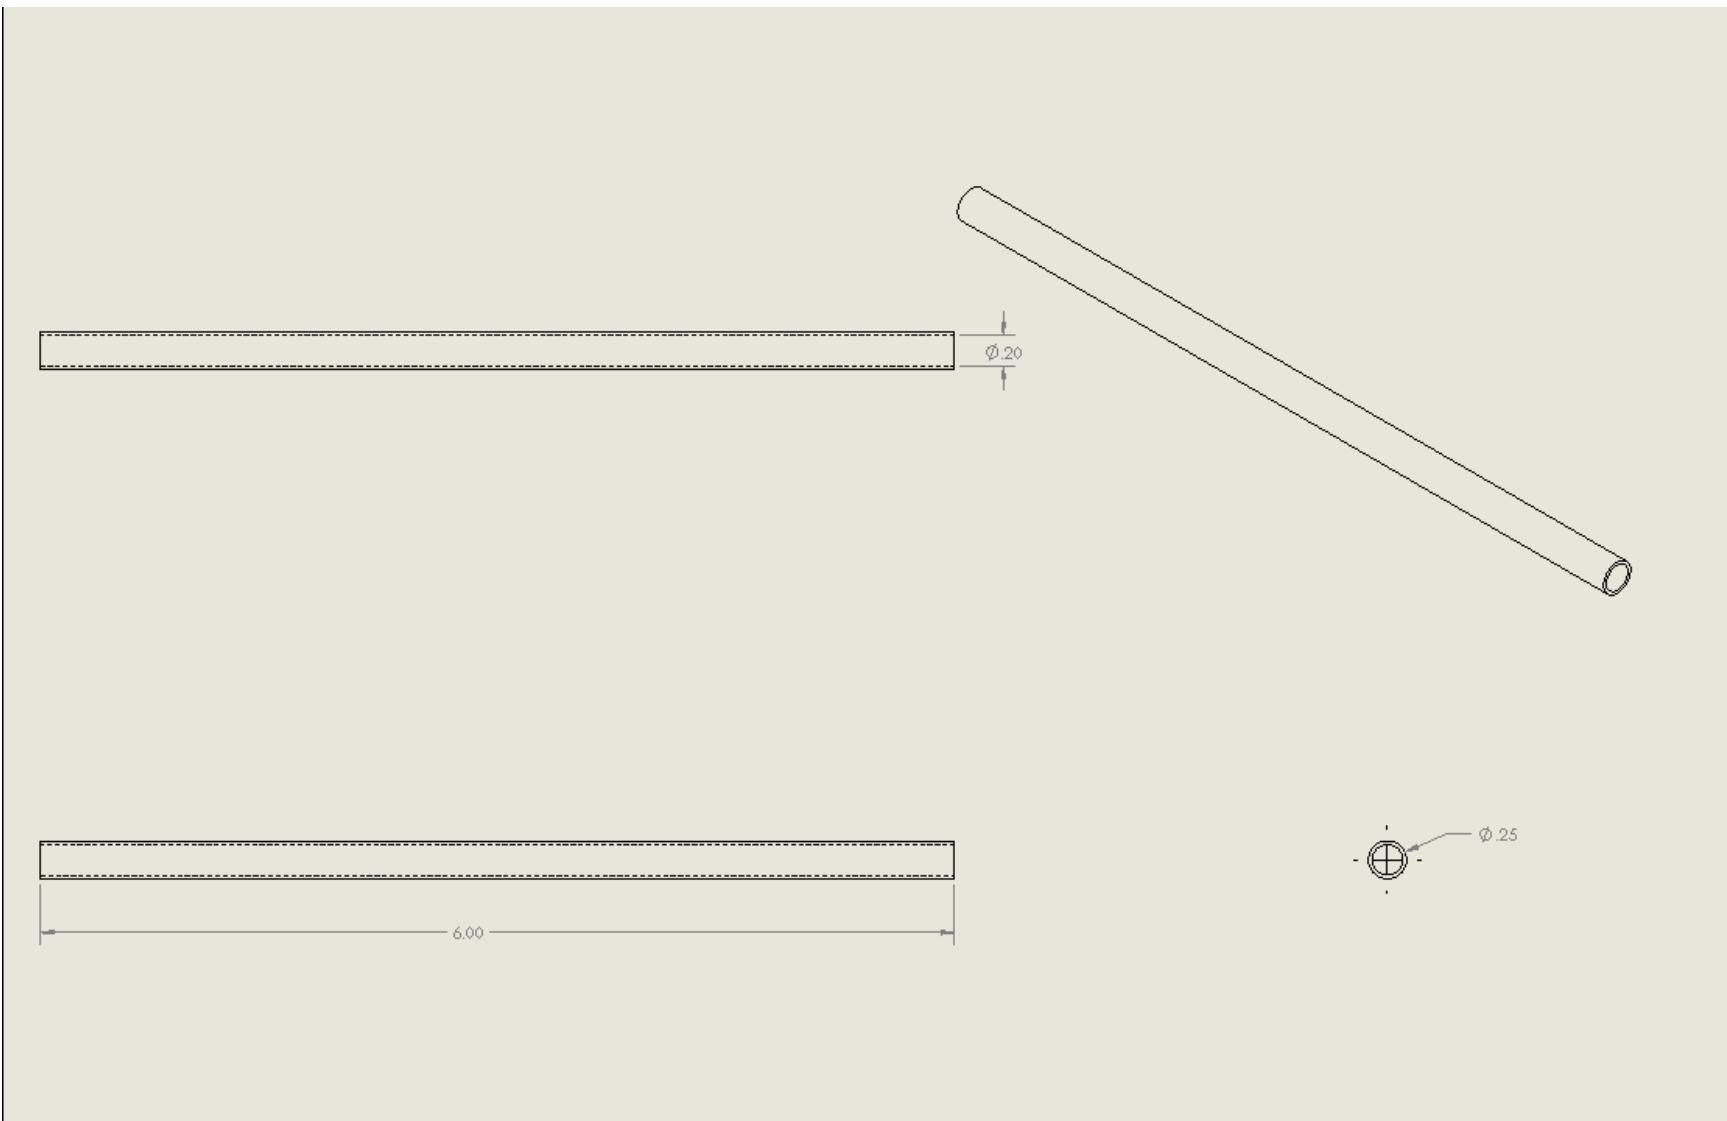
Part 1015 (Crack-Resist Polypropylene Semi-Clear Tubing) Part Drawing
